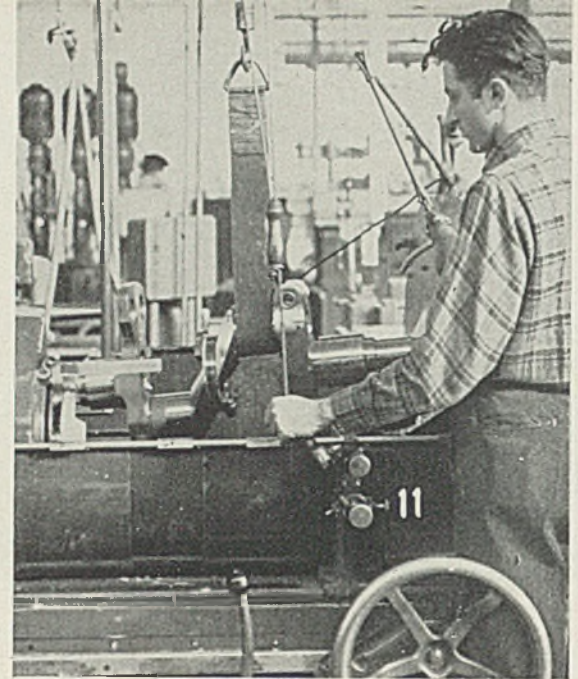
Throughout the entire series of operations, every provision is made for efficient handling of the parts. Wherever the assembled crankshaft must be handled in and out of machines, a hoist is provided with a leather or fabric strap to prevent marring highly finished surfaces. Here an operator is mounting an assembled shaft into an external grinding machine where diameters will be finish ground and the overall length established. A power hoist prevents fatigue
